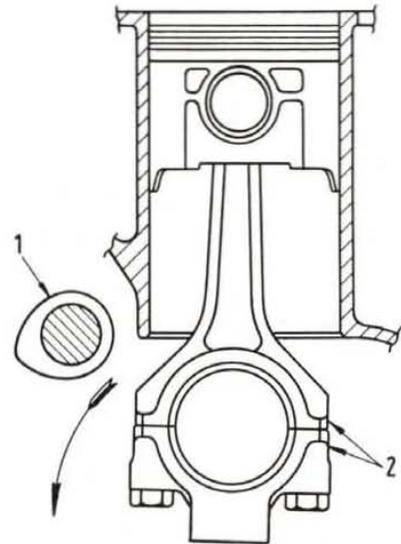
Installation diagram of piston-connecting rod assembly. 1. Camshaft. - 2. Location of connecting rod identification number.
